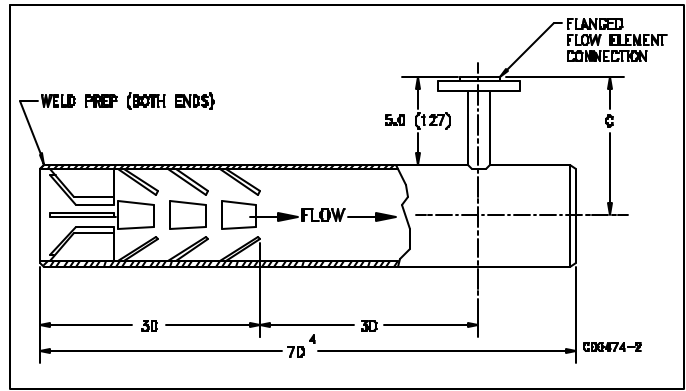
VMR with Butt Weld Preparation Process Connections and Flanged Flow Element Connection
